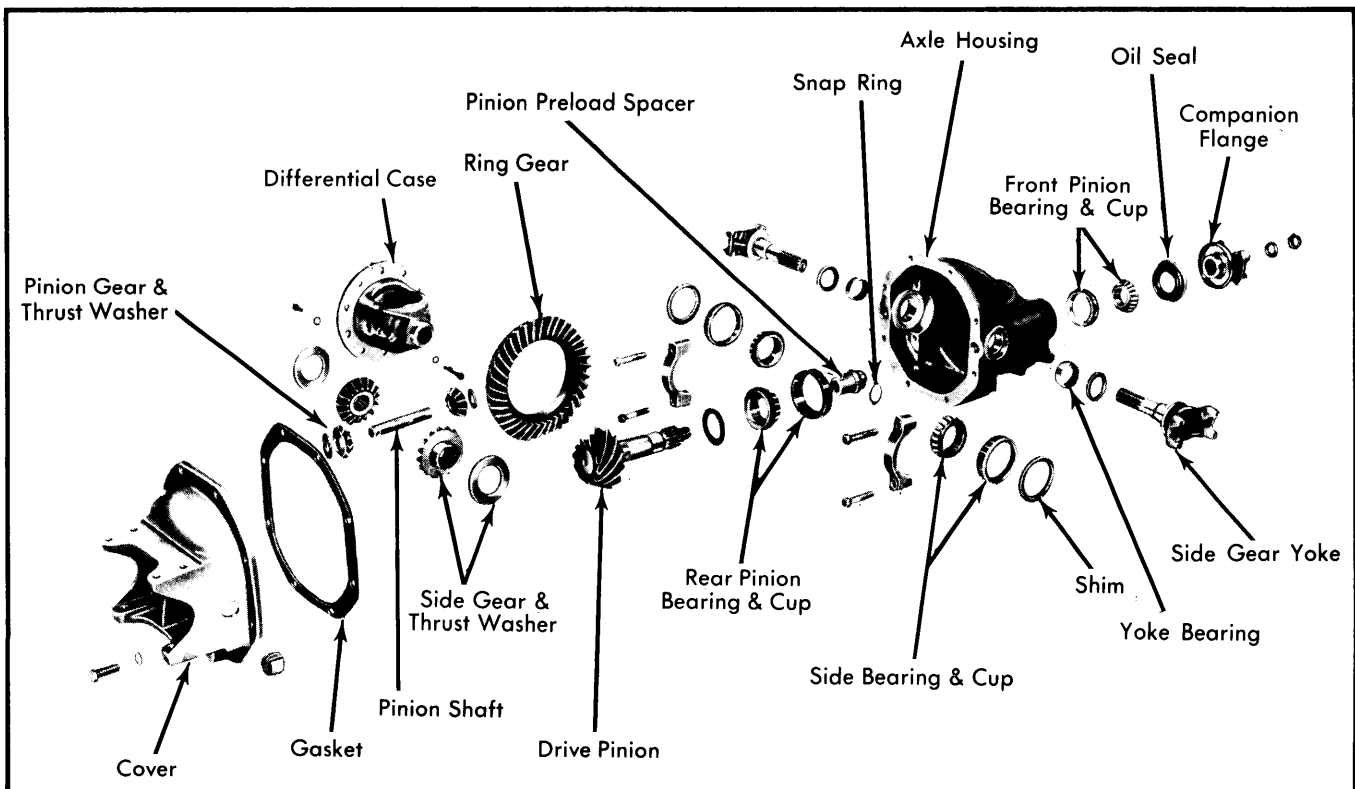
Exploded View of Corvette Rear Axle Assembly
